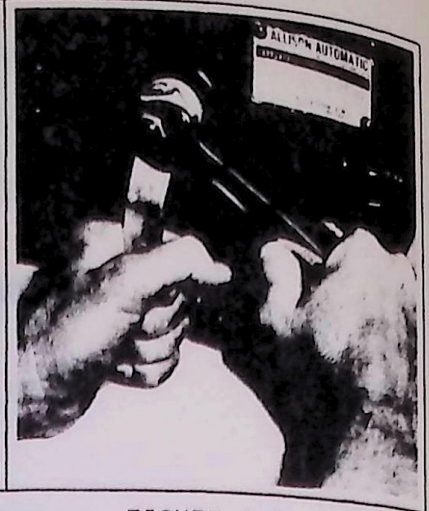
Installing (or Removing) TV Lever Retaining nut.
